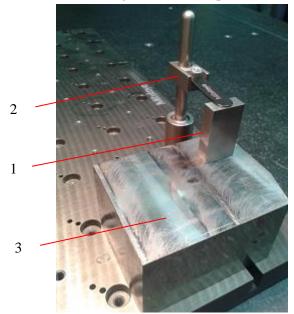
Fixation of the gage block: 1 – gage block, 2 – spring clamp, 3 – steel base
